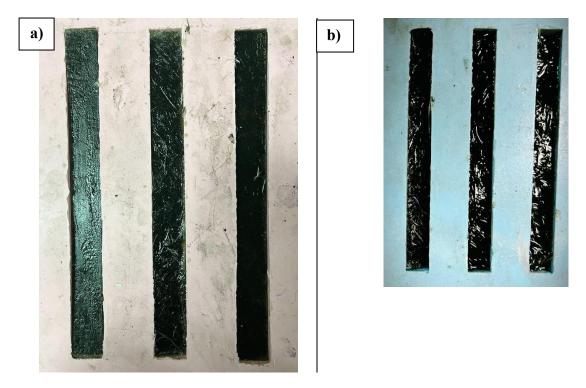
Samples within the silicon mold a) tensile samples b) impact samples.
